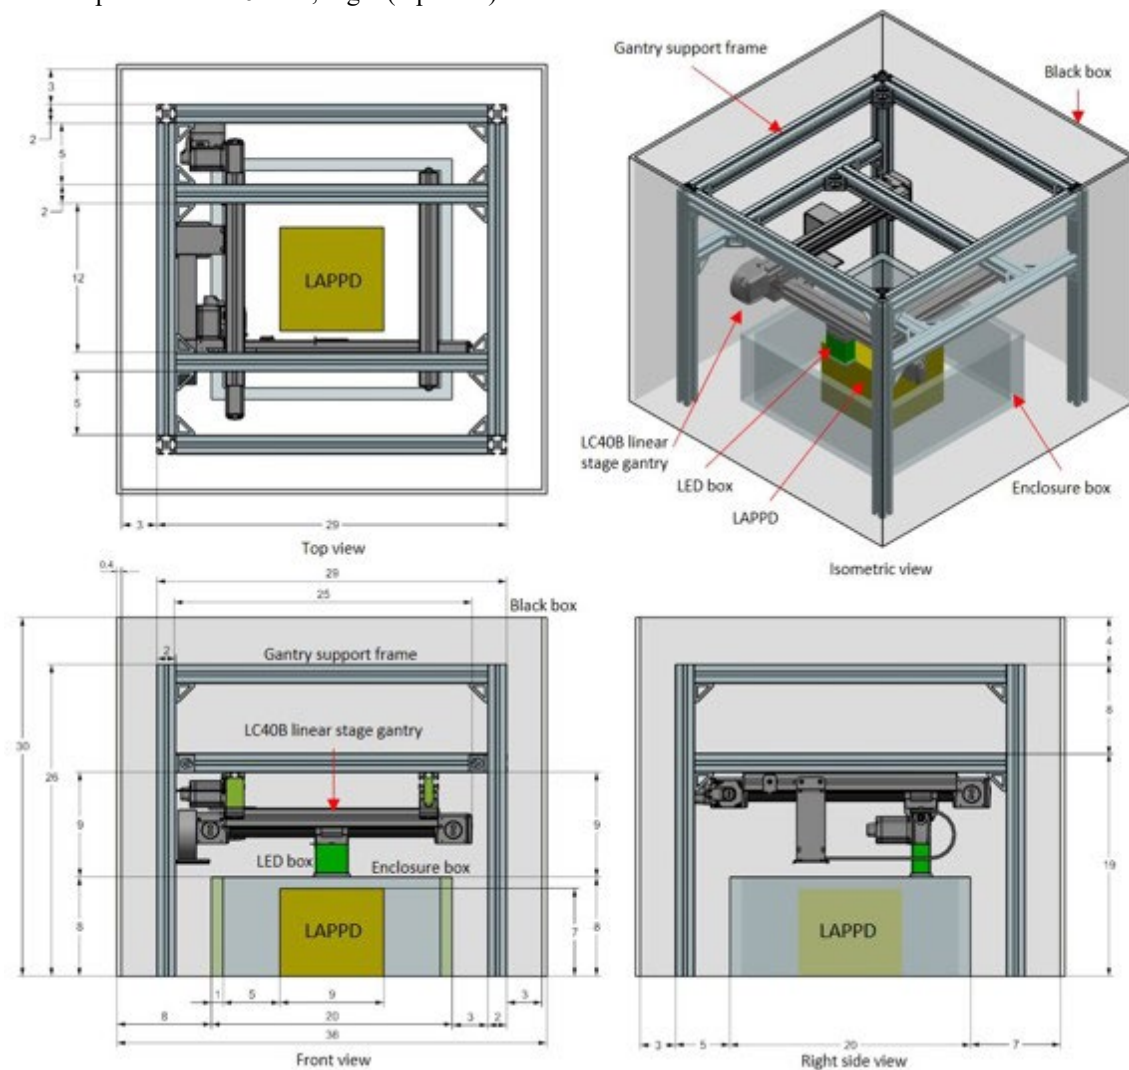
Three-dimensional design generated with NX-12 showing different views of the LAPPD test stand inside the black box. Dimension units are inches.
